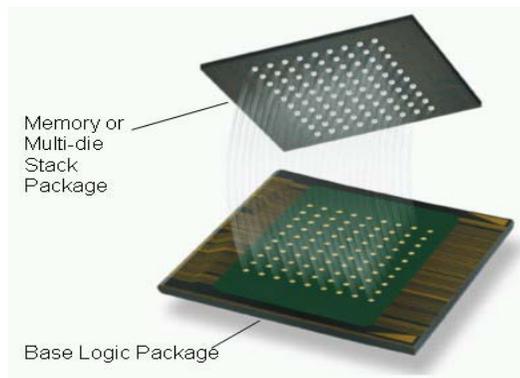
μ Z Fold-Over and Stacked Package Enables Board Level Sequential Assembly of Components Supplied from Multiple Sources
